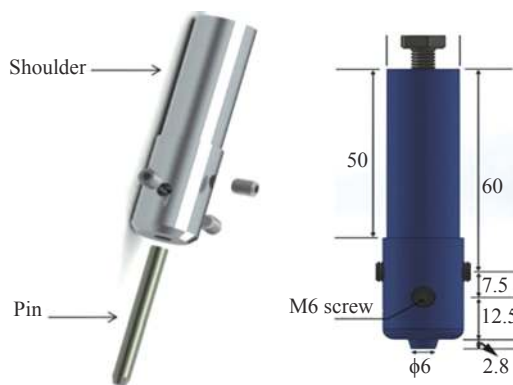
Schematic of the tool utilized for FSP and FSVP (mm).
